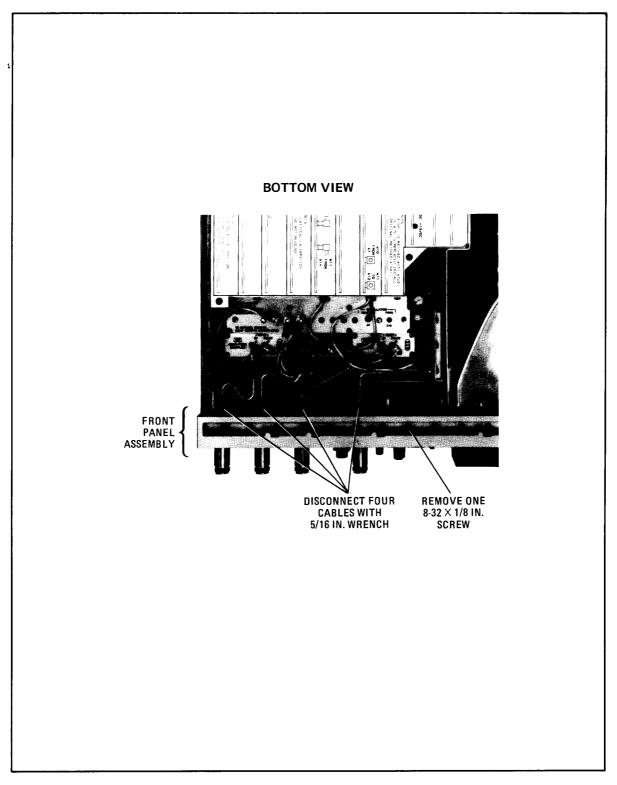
Bottom View Showing Disassembly of Front Panel Assembly from Instrument
